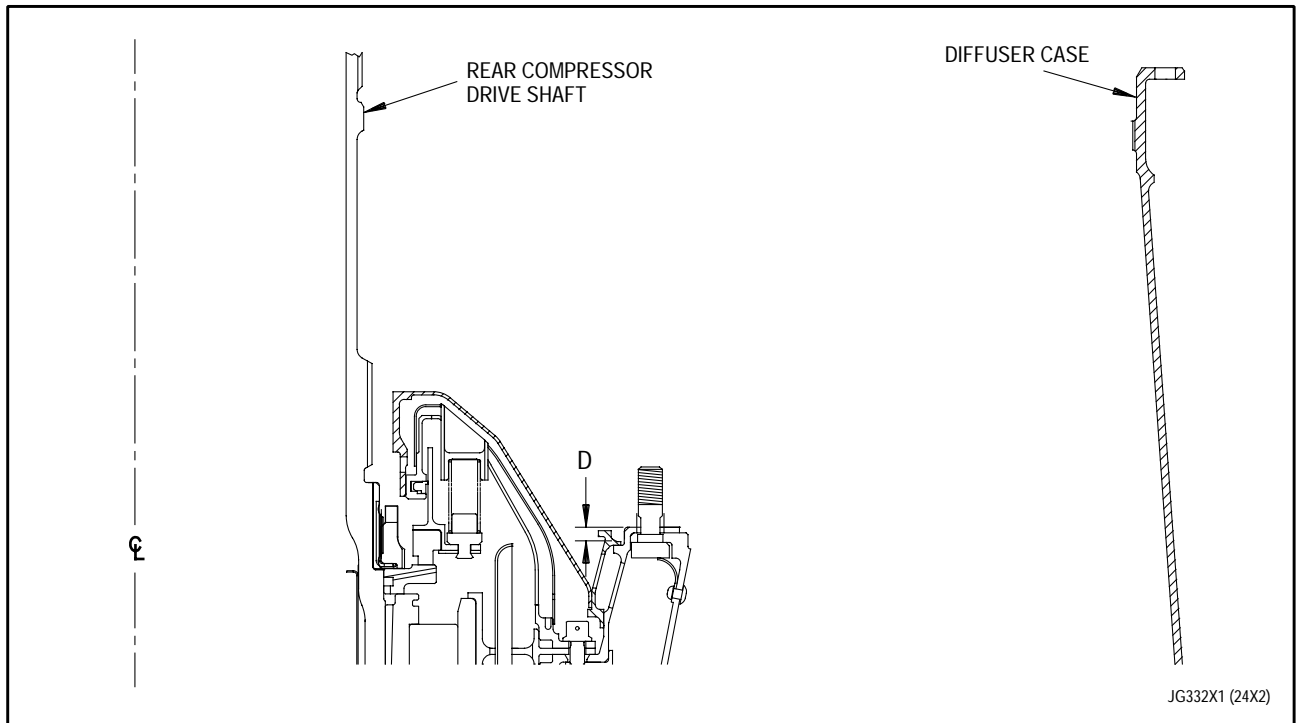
Dimension D- From Flange of No. 4 Bearing Front Air Seal Ring to Rear Face of No. 4 Bearing Rear Air Seal Seating Flange
